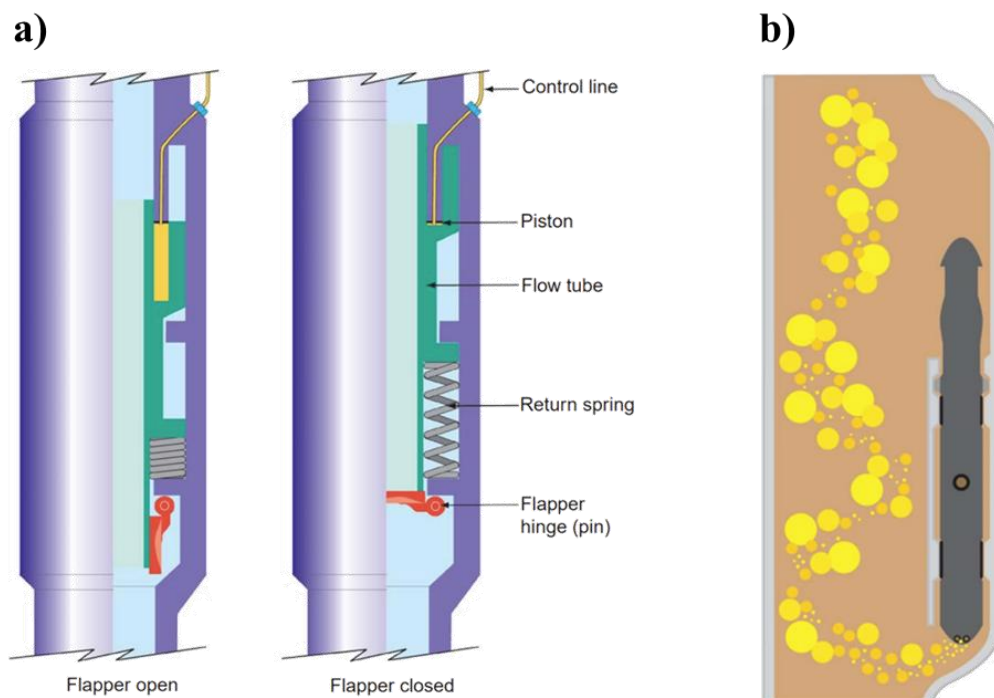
Some of the tools installed in the upper completion. a) Subsurface Safety Valve (SSV) [6]. b) Gas lift valve in a side pocket mandrel [6].
